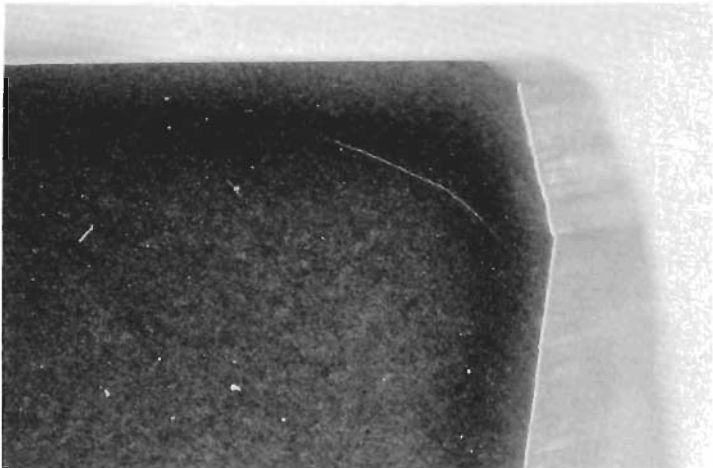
Spiral bevel gear tooth. Internal rupture at top corner of case/core interface.
